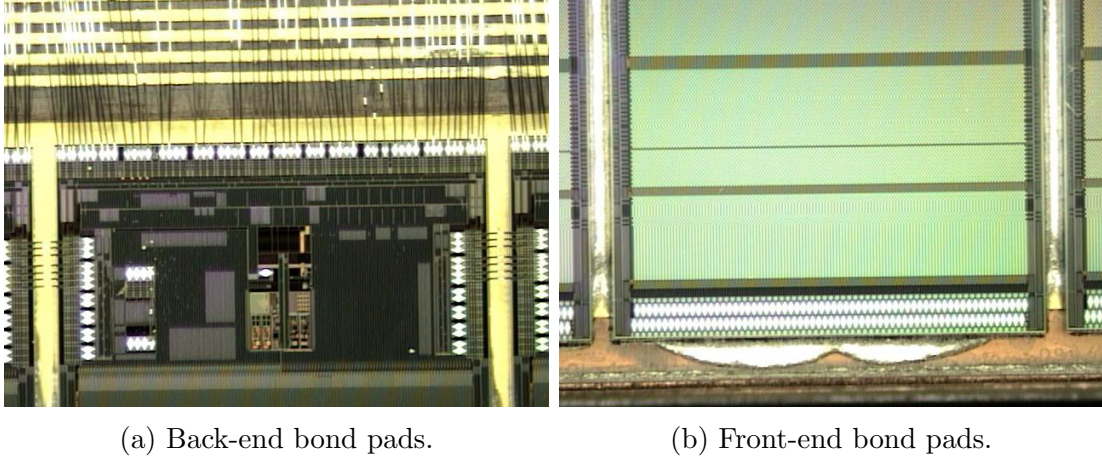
A picture taken with a microscope showing the different bond pads of the ASIC.
